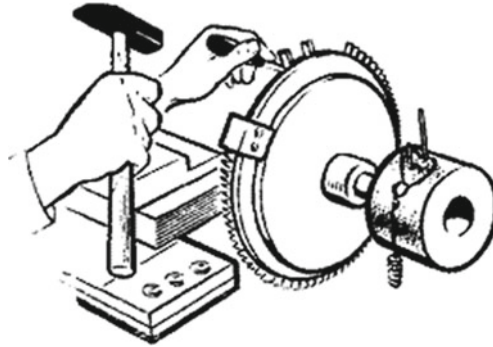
Circumferential mounting of rotor blades in annular-shaped grooves
